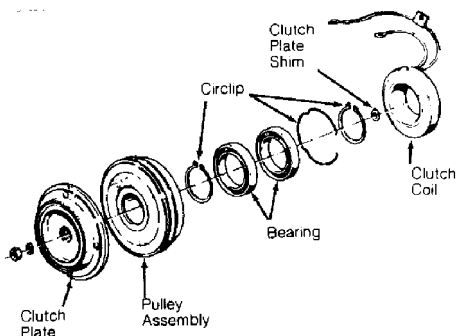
Exploded View Of Compressor Clutch (Bosch 6-Cylinder)
